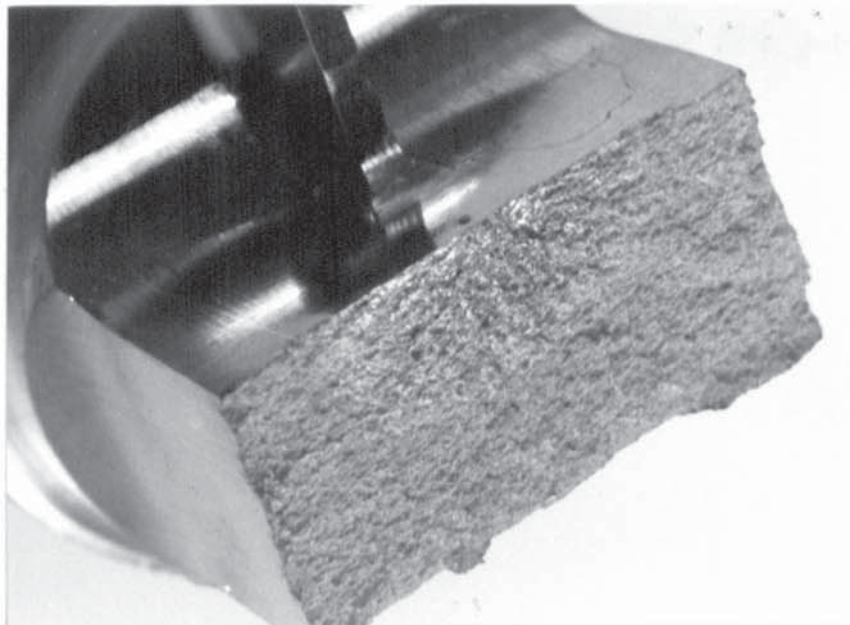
Thumbnail Crack Specimen Fatigued to Final Fracture.
